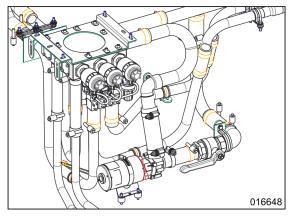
FT5000 coolant circulating pump located in compartment in front of left drive axle wheels
